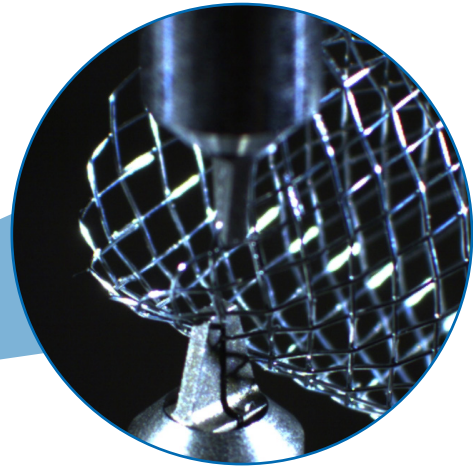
The laser welded joints within a stent require a high magnification scope to identify the correct wire to pull.
